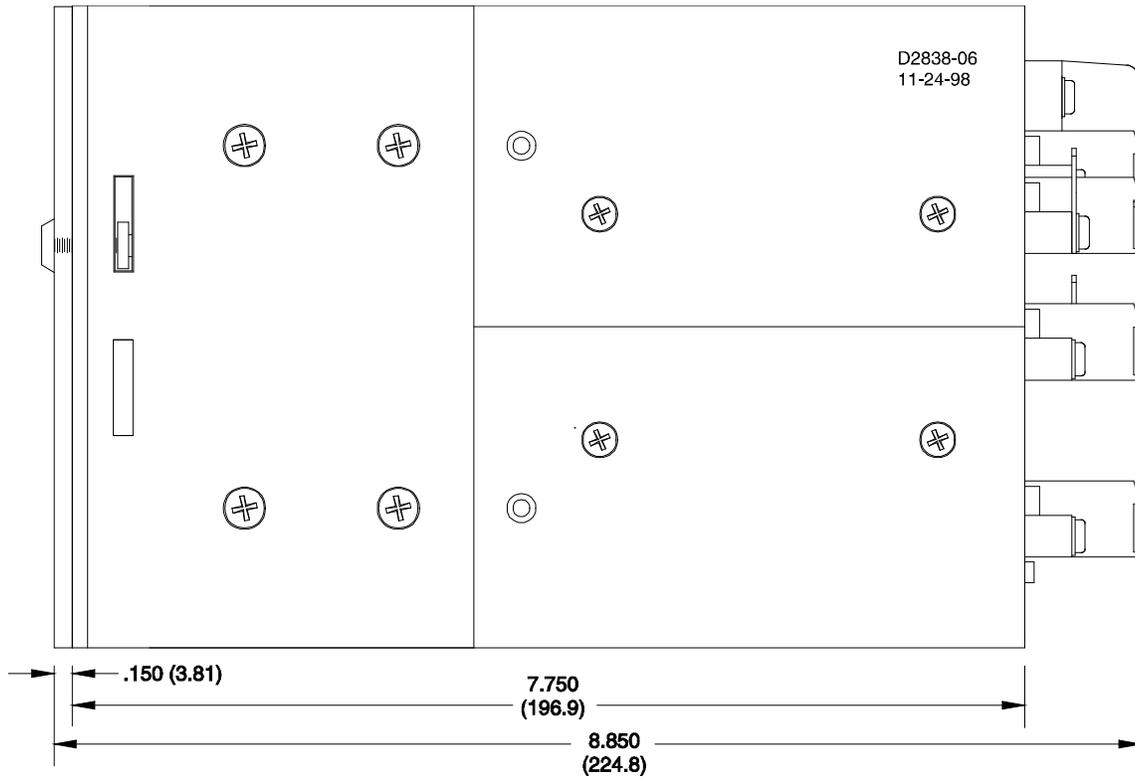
Rack Mount PSS-100 Outline Dimensions, Side View
